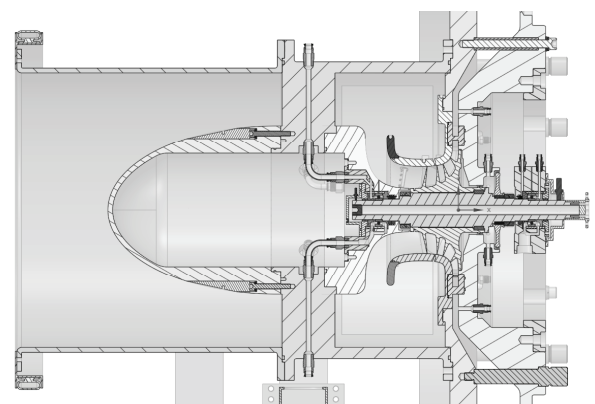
Cross-sectional view of the 1-stage compressor performance test rig
